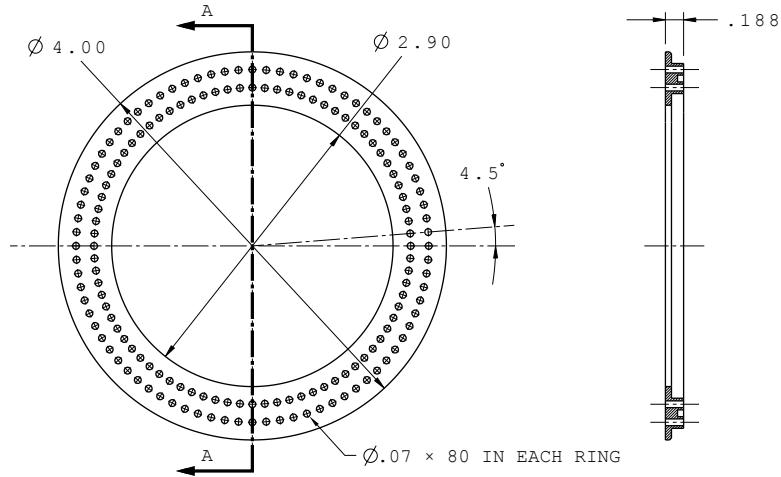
Injector plate, front and section view (dimensions in inches).
